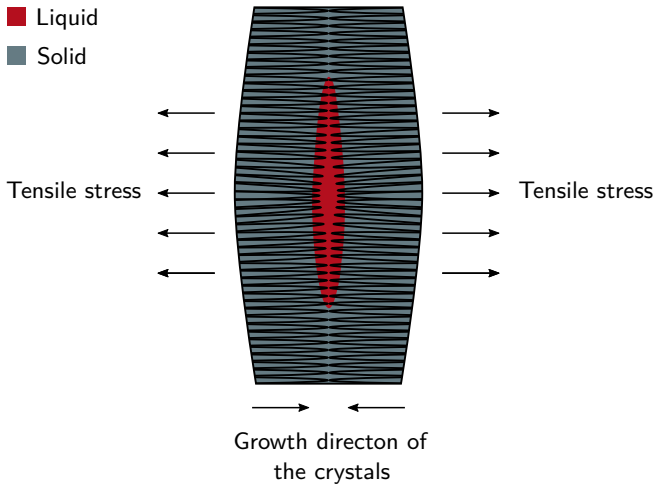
Schematic of centerline solidification cracking in the bulging region during deep penetration laser beam welding of low-alloyed and unalloyed steels
